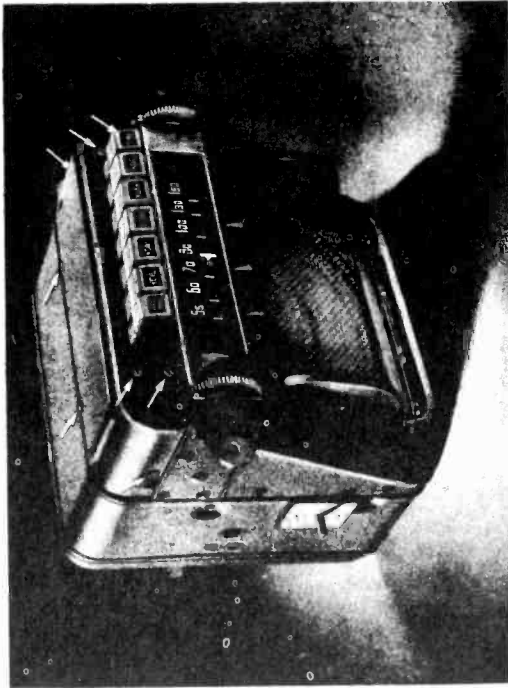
Remove these 8 Screws to Disassemble tuner cover
